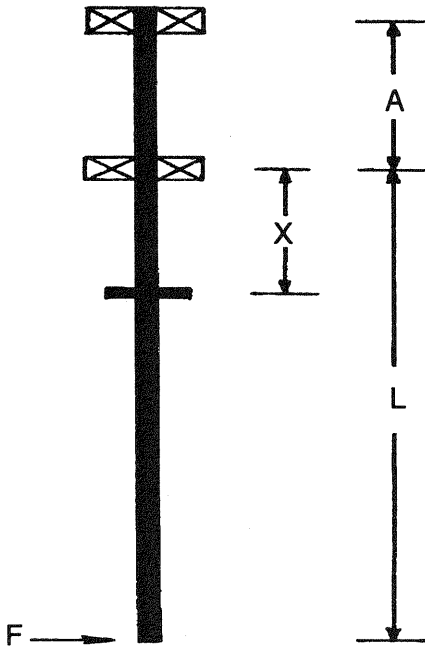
Load and calculated deflection on mixer shaft bearings
